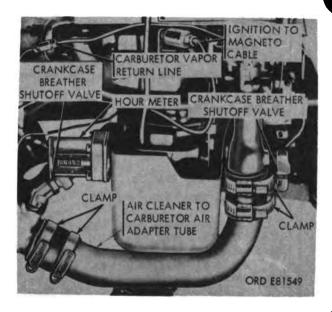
Air cleaner-to-carburstor adapter tube.
